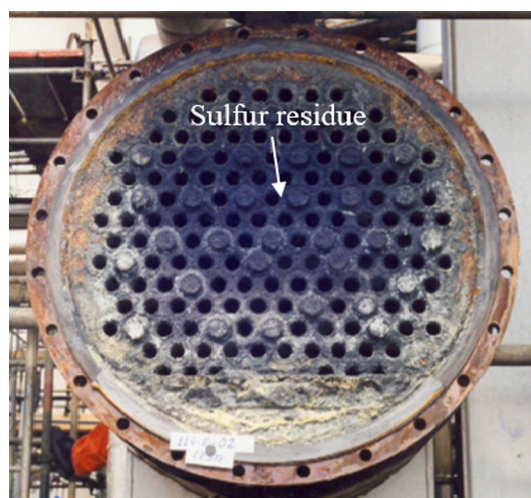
A Solid residue deposited on the tube-to-tubesheet joints of heat exchangers in sulfur recovery unit [185].
